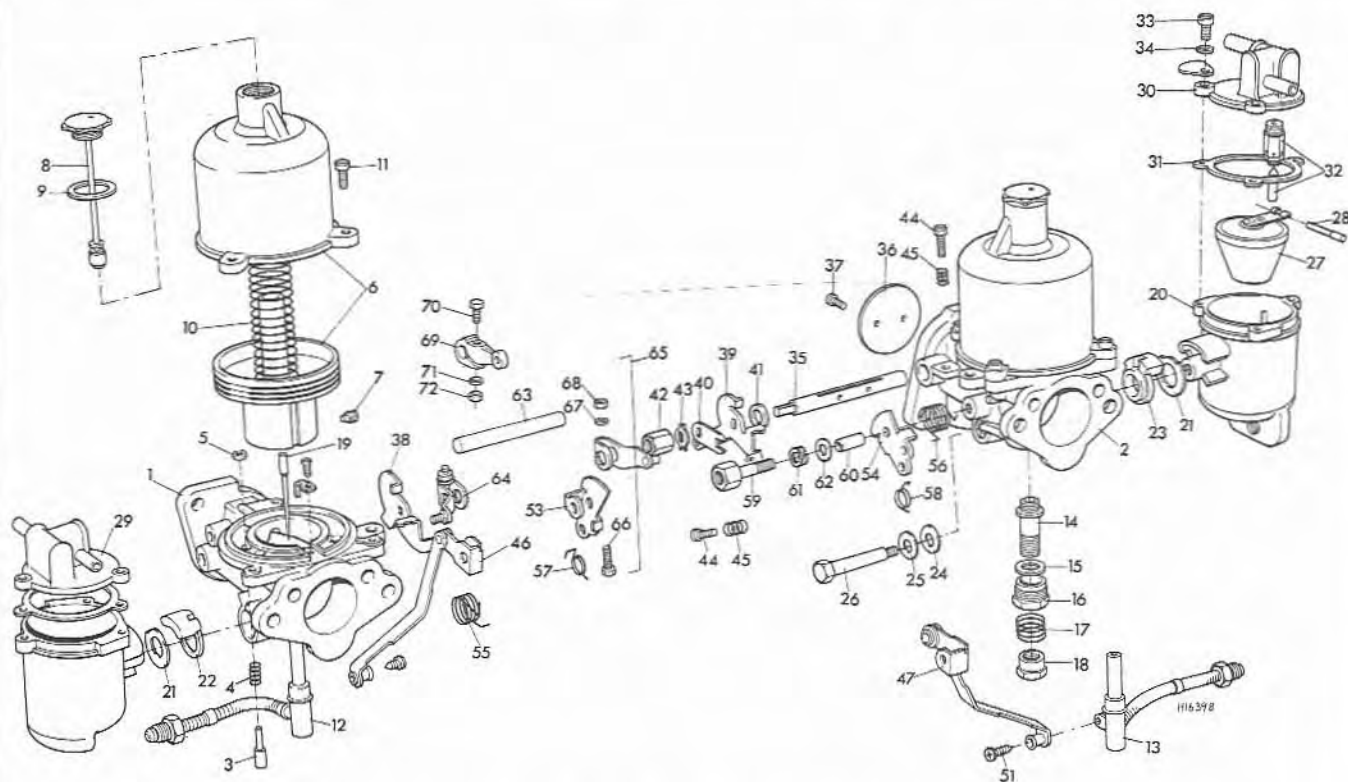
Exploded view of twin HS4 carburettor installation (Sec 7)
